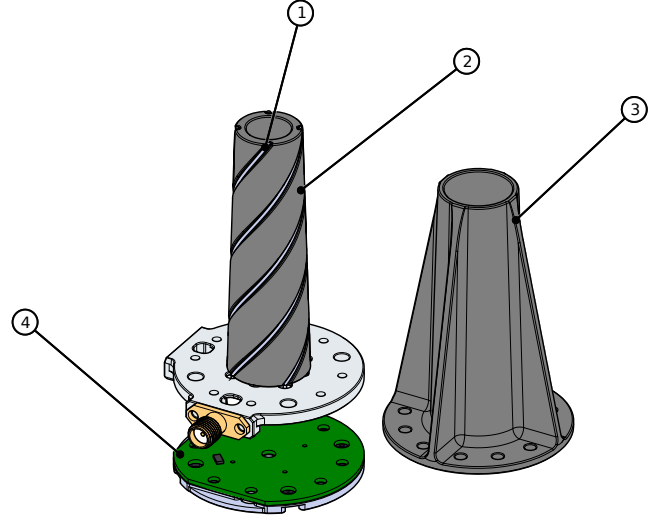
QHA exploded view. Four helix arms (1) reside inside grooves on inner dielectric cone (2). This assembly is in turn covered by outer dielectric cone (3) and is placed on the aluminum case. Helices and SMA connector are soldered to the ports of the PCB (4).
